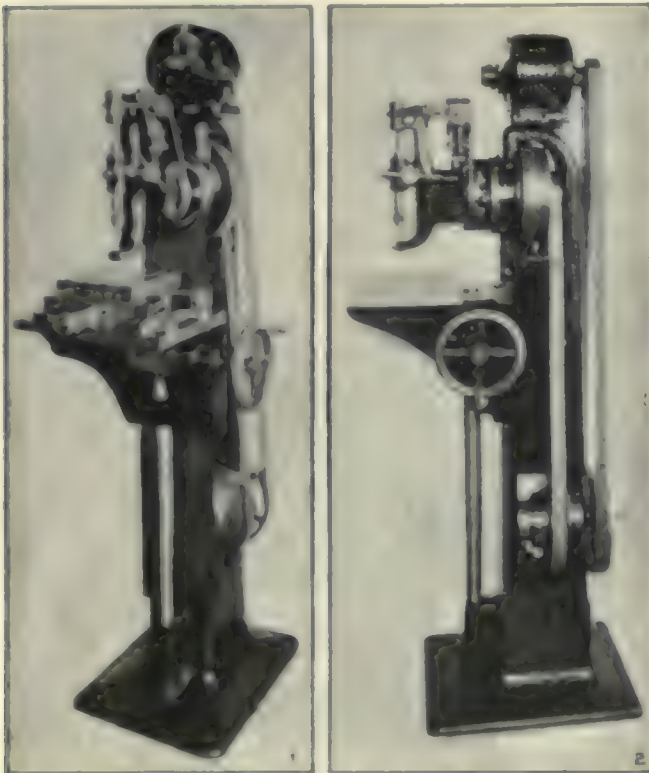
K-N LAYING OUT AND DRILLING MACHINE.
